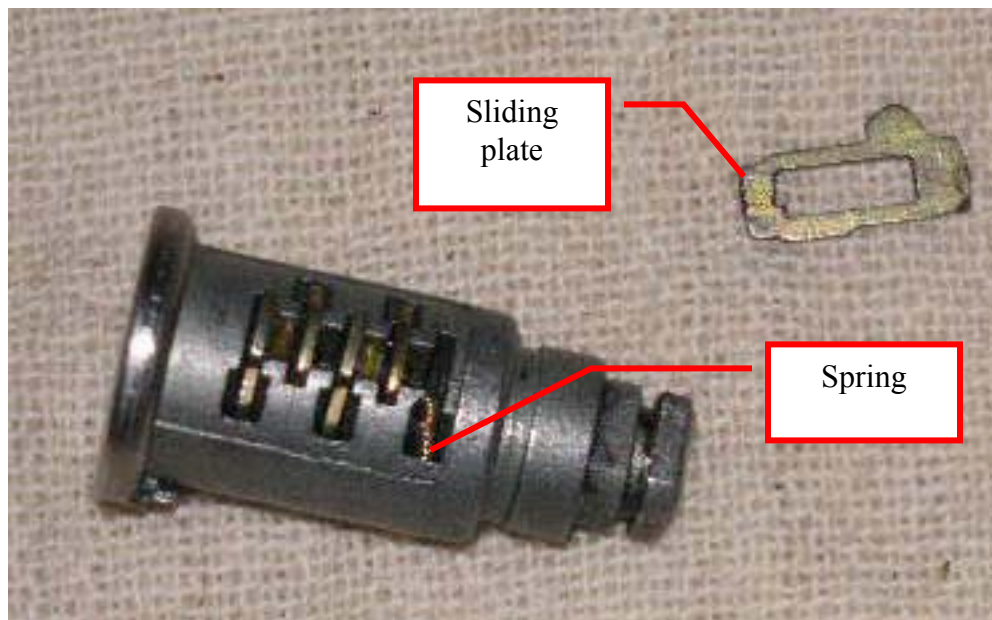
Picture showing one sliding plate removed from the tumbler with its spring still inside the tumbler. Note the orientation of the tumbler where the plate was removed from the tumbler.
